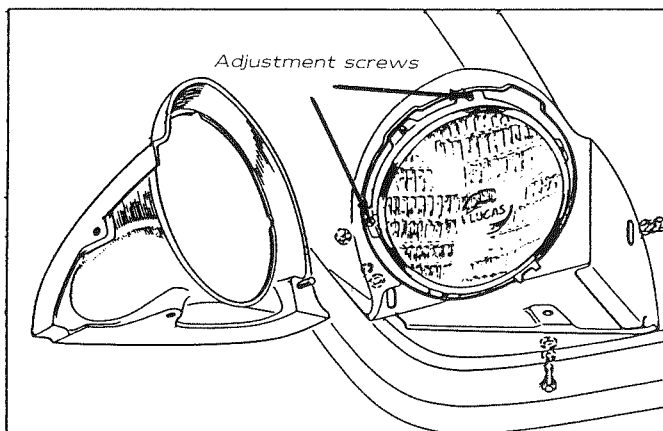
Headlight adjustment screws and location of cowl fixing nuts & bolts
